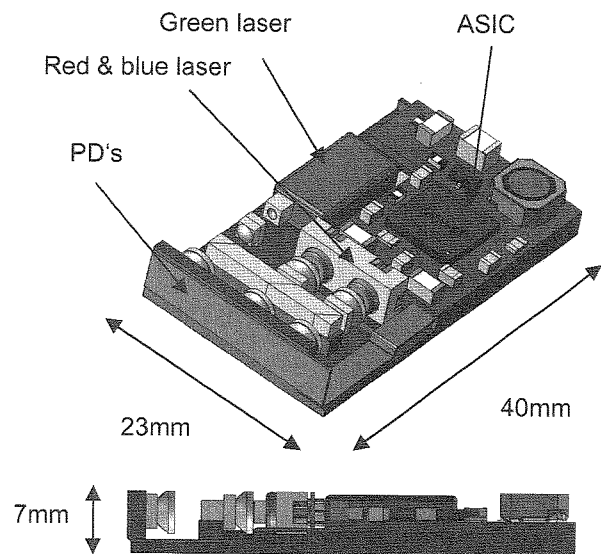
Mechanical drawing of the RGB laser module with integrated photodiodes, laser driver ASIC and switching power supply.
